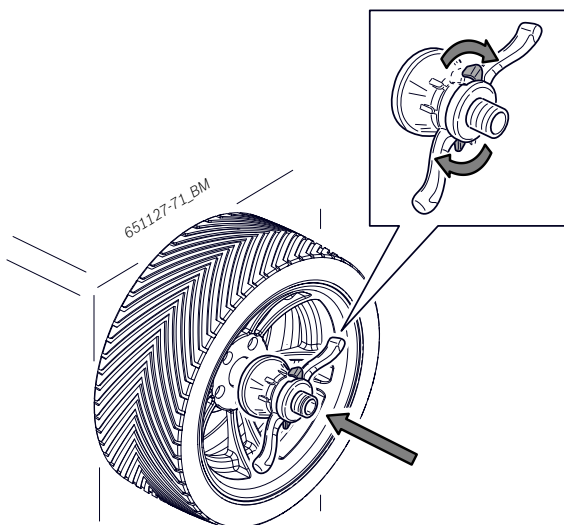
Sliding the (disengaged) quick-locking nut onto the shaft
